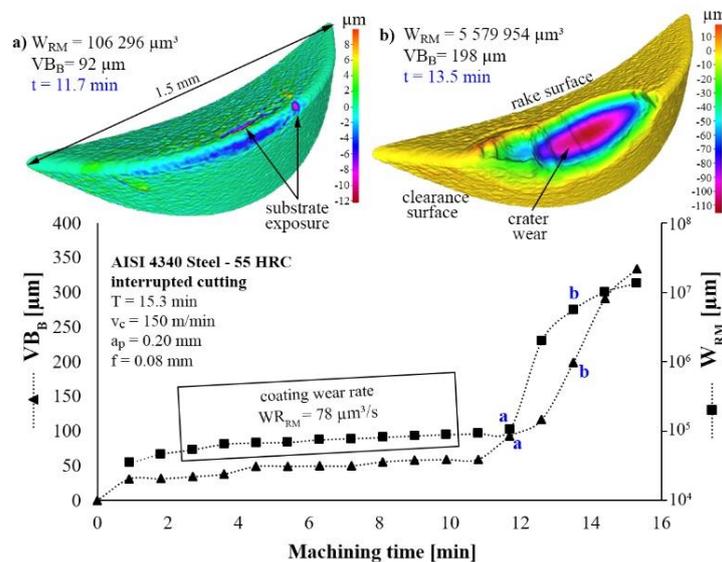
Evolution wear of the coated cemented carbide tool wear for interrupted cutting.
